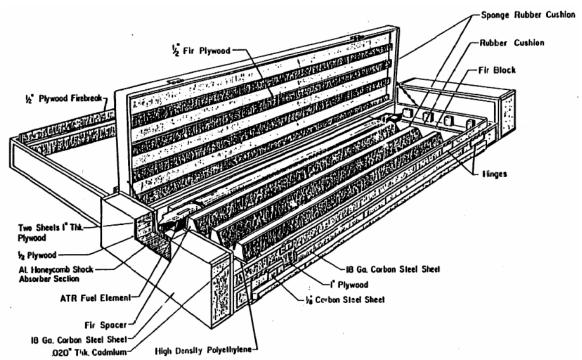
SKETCH OF ATR FRESH FUEL SHIPPING CONTAINER CAPABLE OF HOLDING FOUR COMPLETE SUBASSEMBLIES
